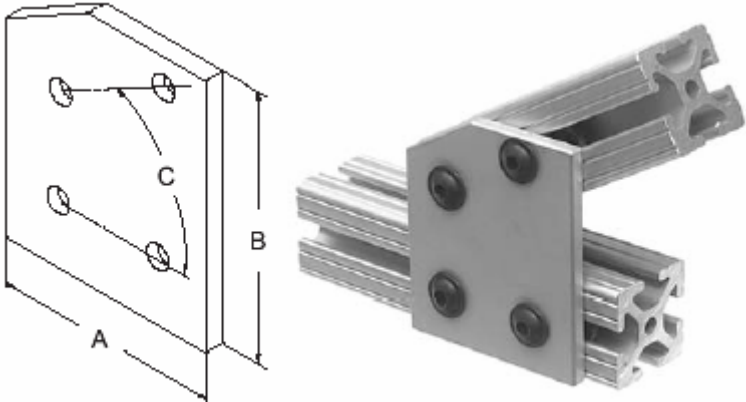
Engineering drawing and an example of the 30° connection bracket we will be using to connect the 8020 for the control panel
